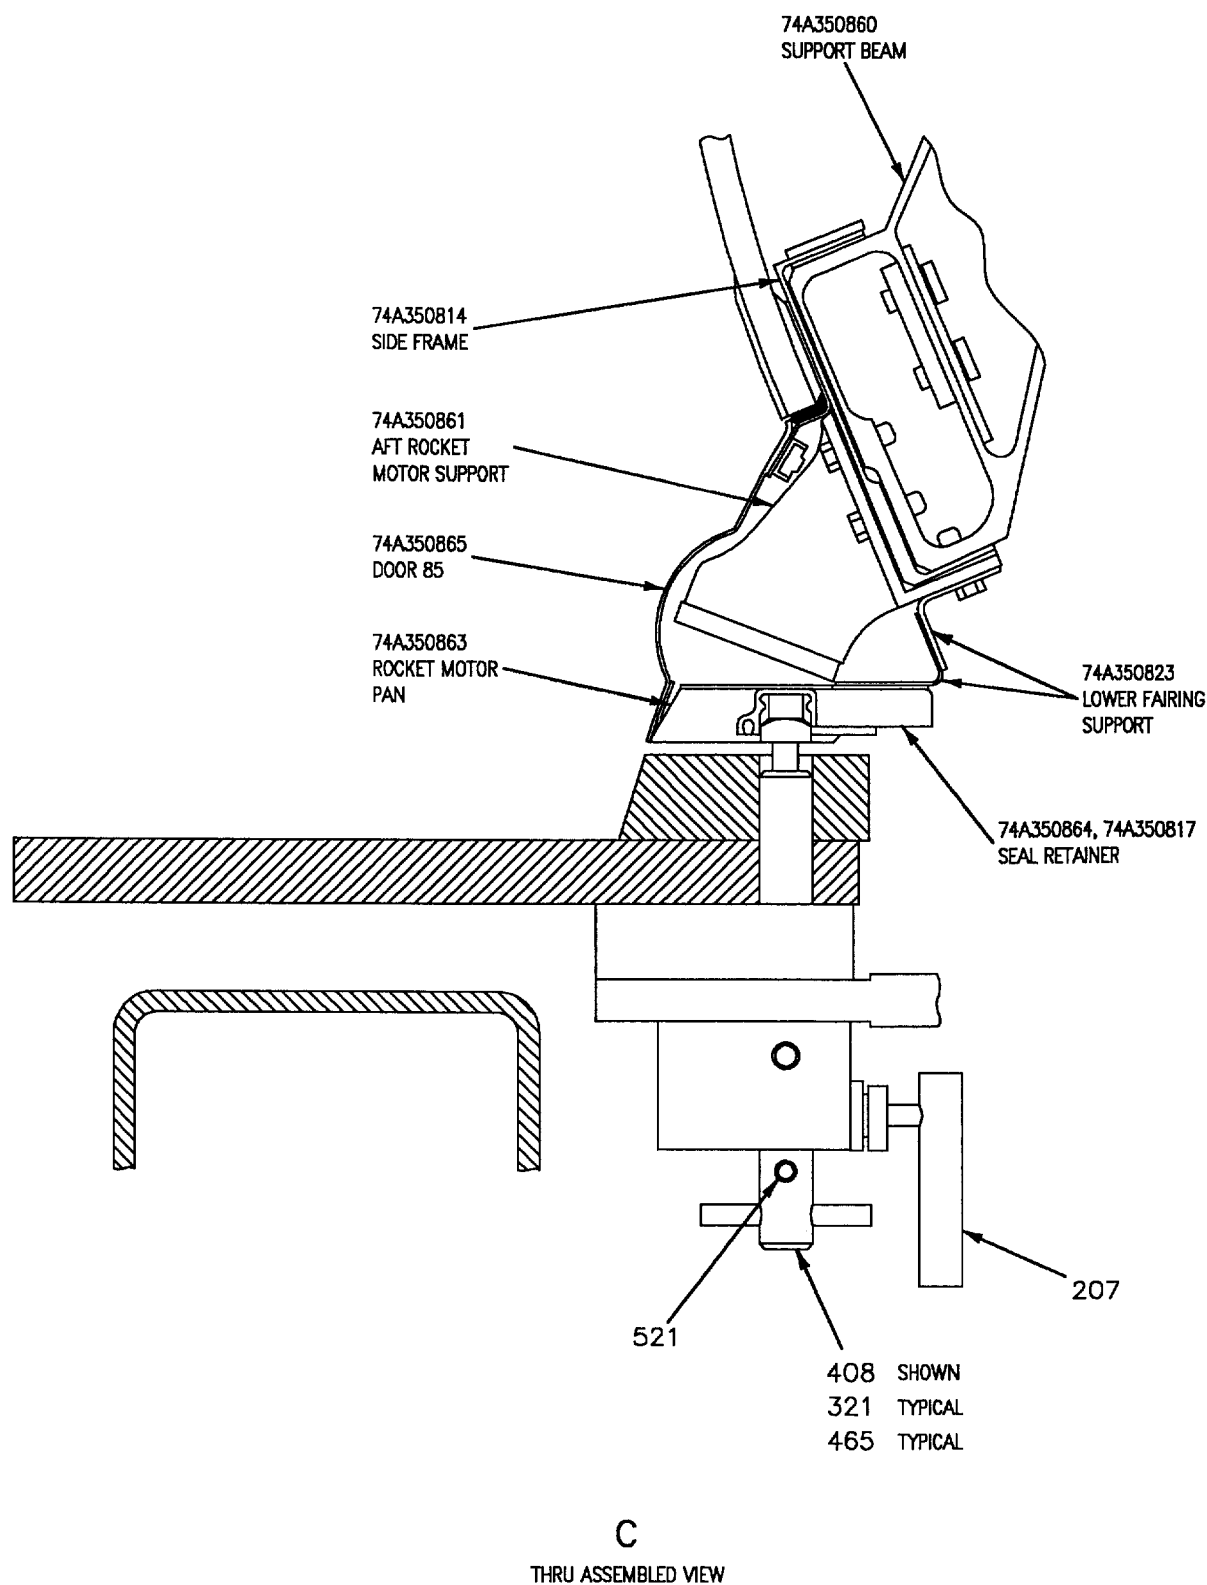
Replacement - Rocket Motor Pan (Sheet 3)
